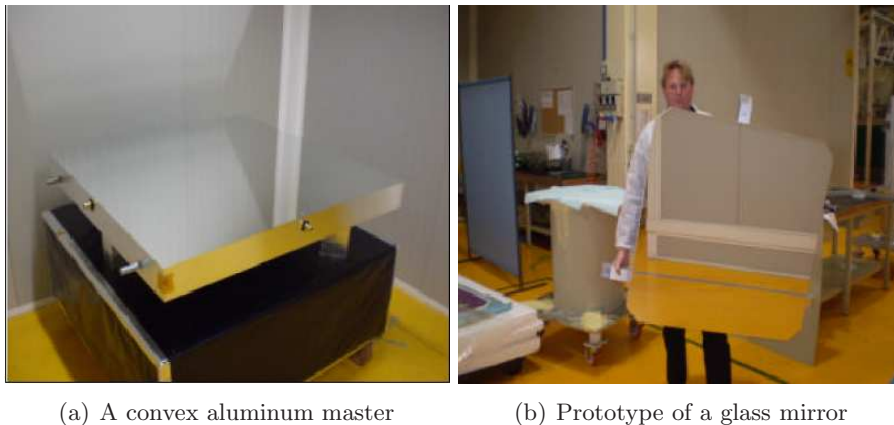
(a) One of the two aluminum masters used for the cold slumping technique; (b) a mirror produced using the master.
